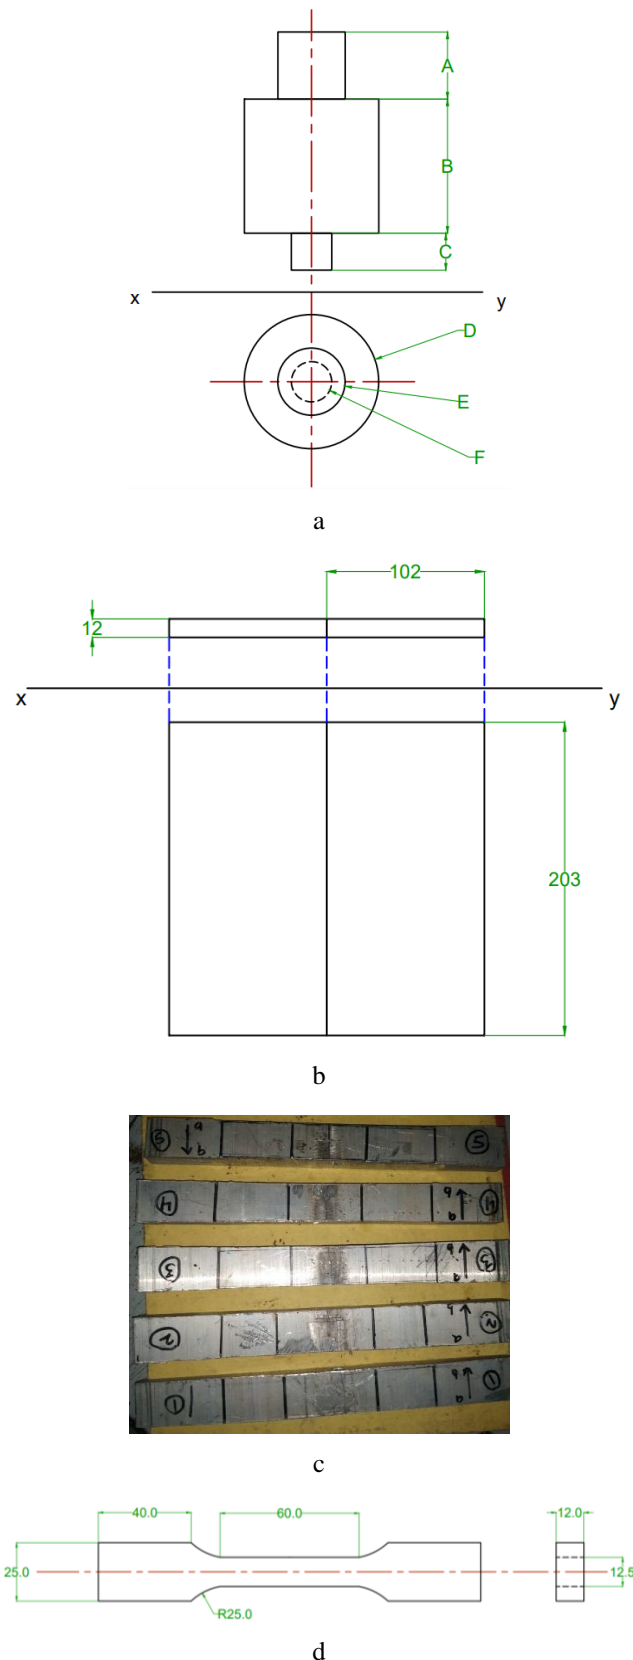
Tool drawing (a), weld specimen drawing (b), weld sample cut into 5 pieces (c) and tensile test specimen (d)
